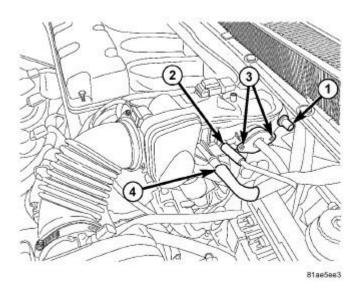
INTAKE TUBE VIEW Courtesy of CHRYSLER LLC
